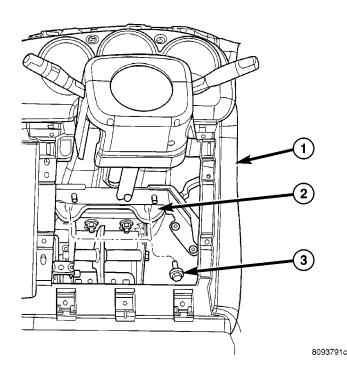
BRAKE PEDAL SUPPORT BRACKET, INSTRUMENT PANEL RETAINING BOLTS
